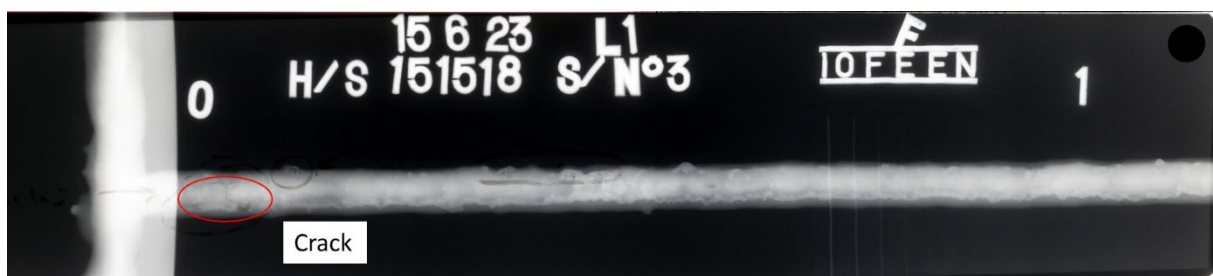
Radiograph of longitudinal weld in a pressure vessel. A crack in the weld is highlighted in red.
